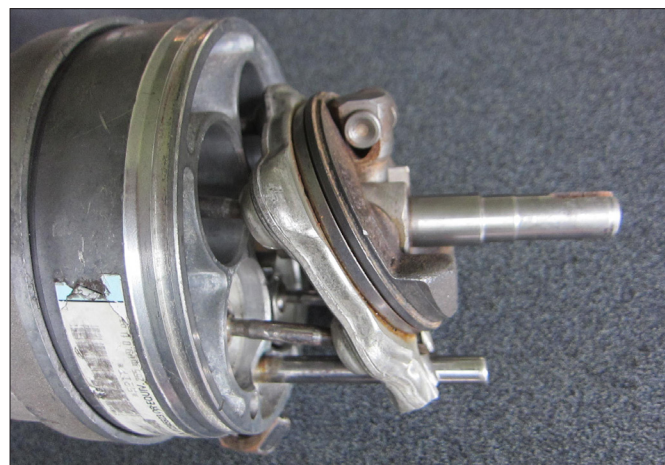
The wobble plate shown is on a large angle, at Maximum Stroke.
